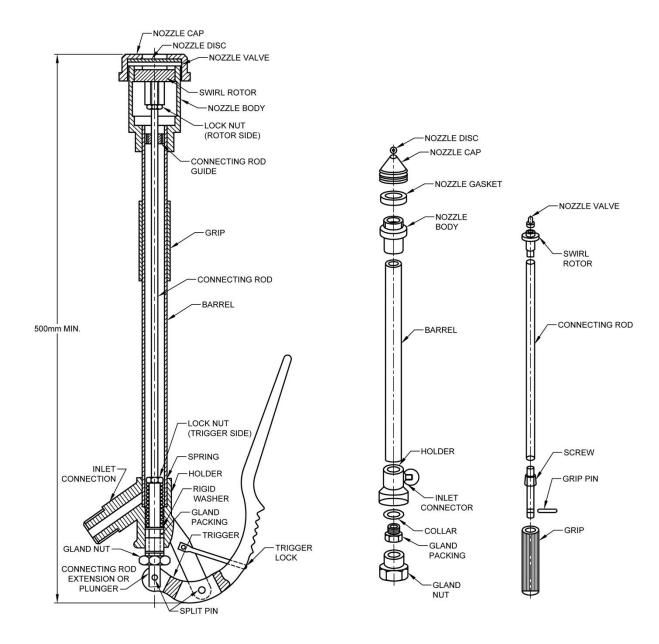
COMPONENTS OF SPRAY GUN (TRIGGER TYPE)
